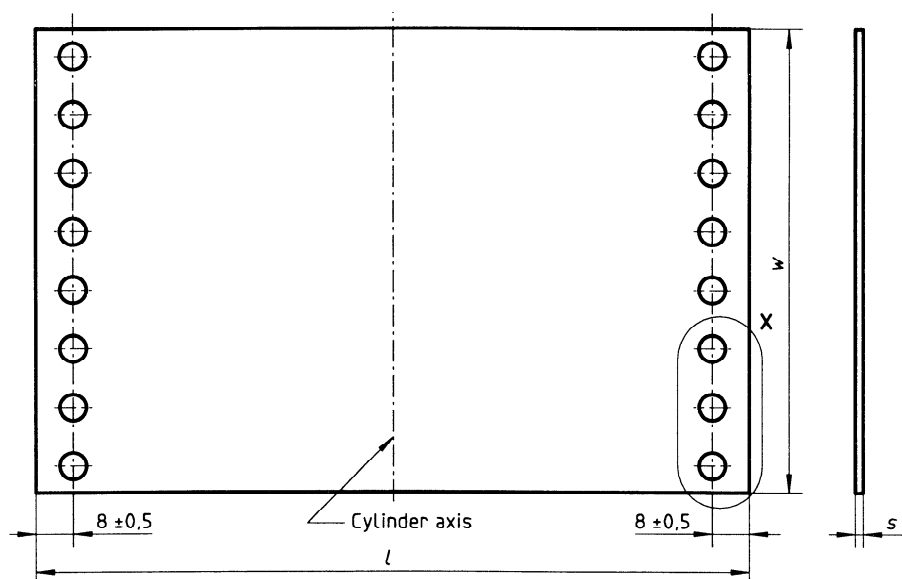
General layout of a perforated plate (example of dimensions and perforation with circular holes of 4,5 mm)
